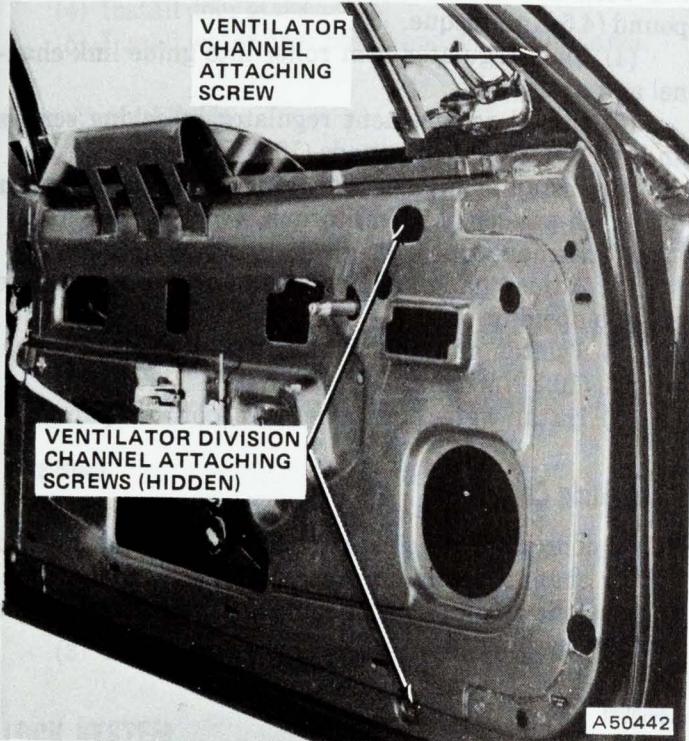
J-9 Ventilator Division Channel Removal —Pacer
